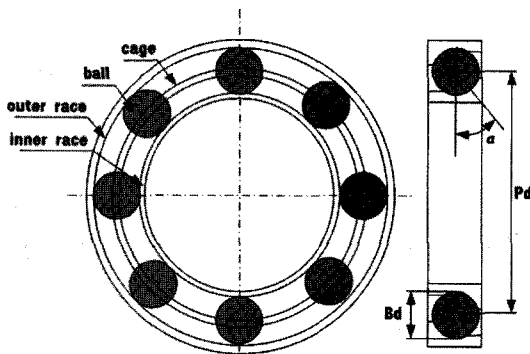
Schematic diagram for geometry and dimension of angular contact ball bearing.
